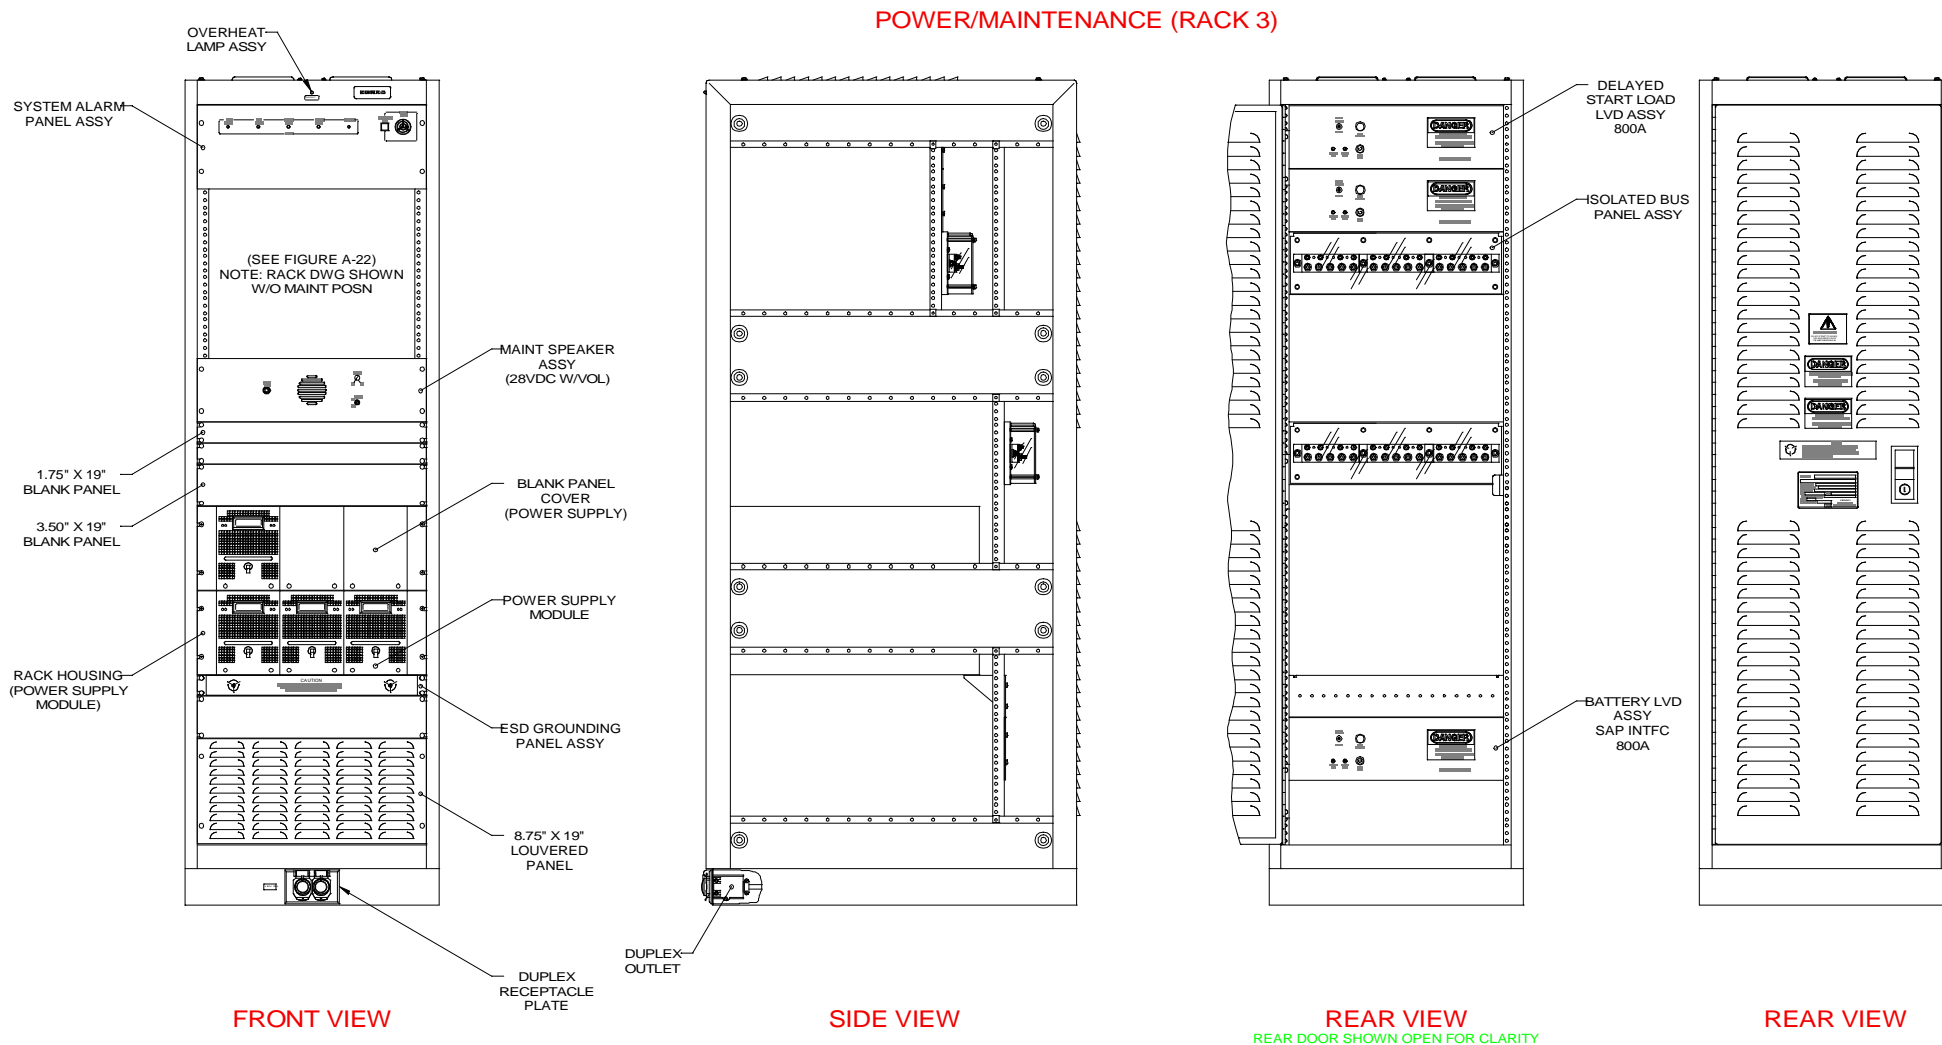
Basic ETVS System 4 (BS-4); Racks 1-7; Front, Side, and Rear Views (Sheet 3 of 7)
